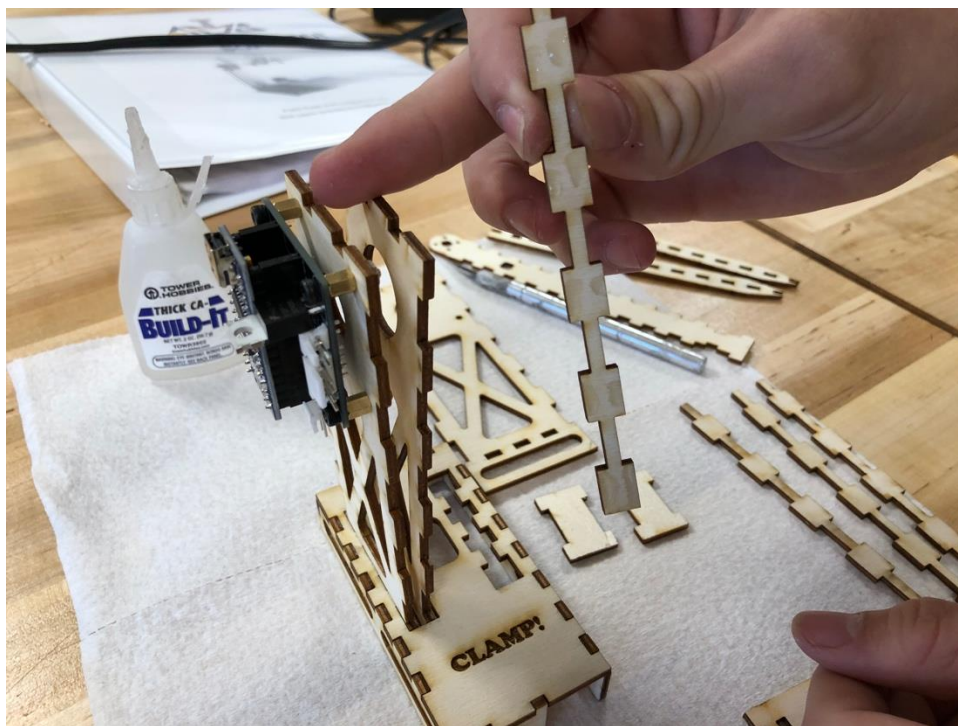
Beginning of tower assembly. Once the thin piece is glued, it will be impossible to adjust the mounting hardware, so make sure it is completely secure at this point.
